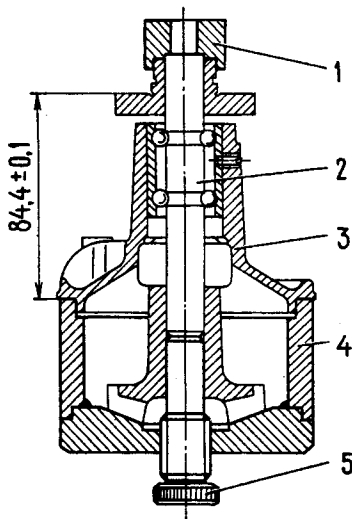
Installing Impeller on Pump Shaft with Tool A.60430:
